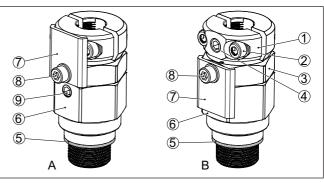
Lock fitting ARV-ECL.2 - up to 25 bar (362 psig)
